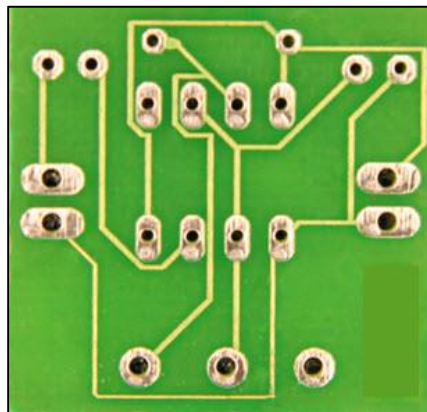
PRINTED CIRCUIT BOARD MANUFACTURING
